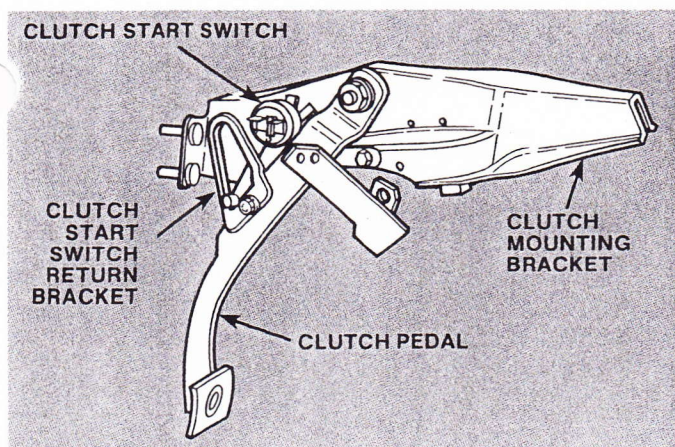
The clutch pedal must be fully depressed to close the clutch switch and complete the control circuit.
